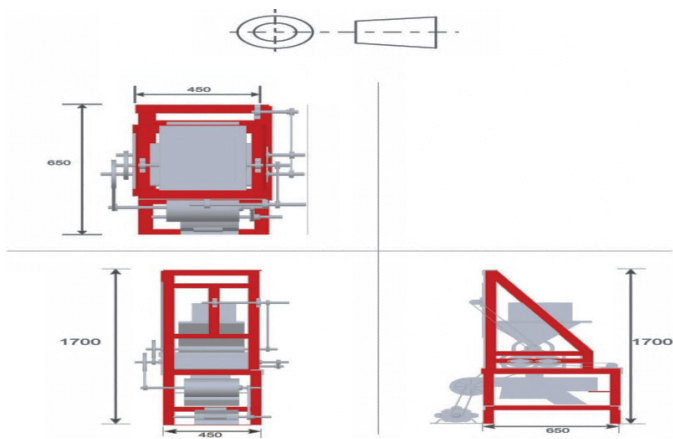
Orthographic view of rice dehusking and destoning of prototype machine after modification and adjustment. (All dimensions are in mm)
